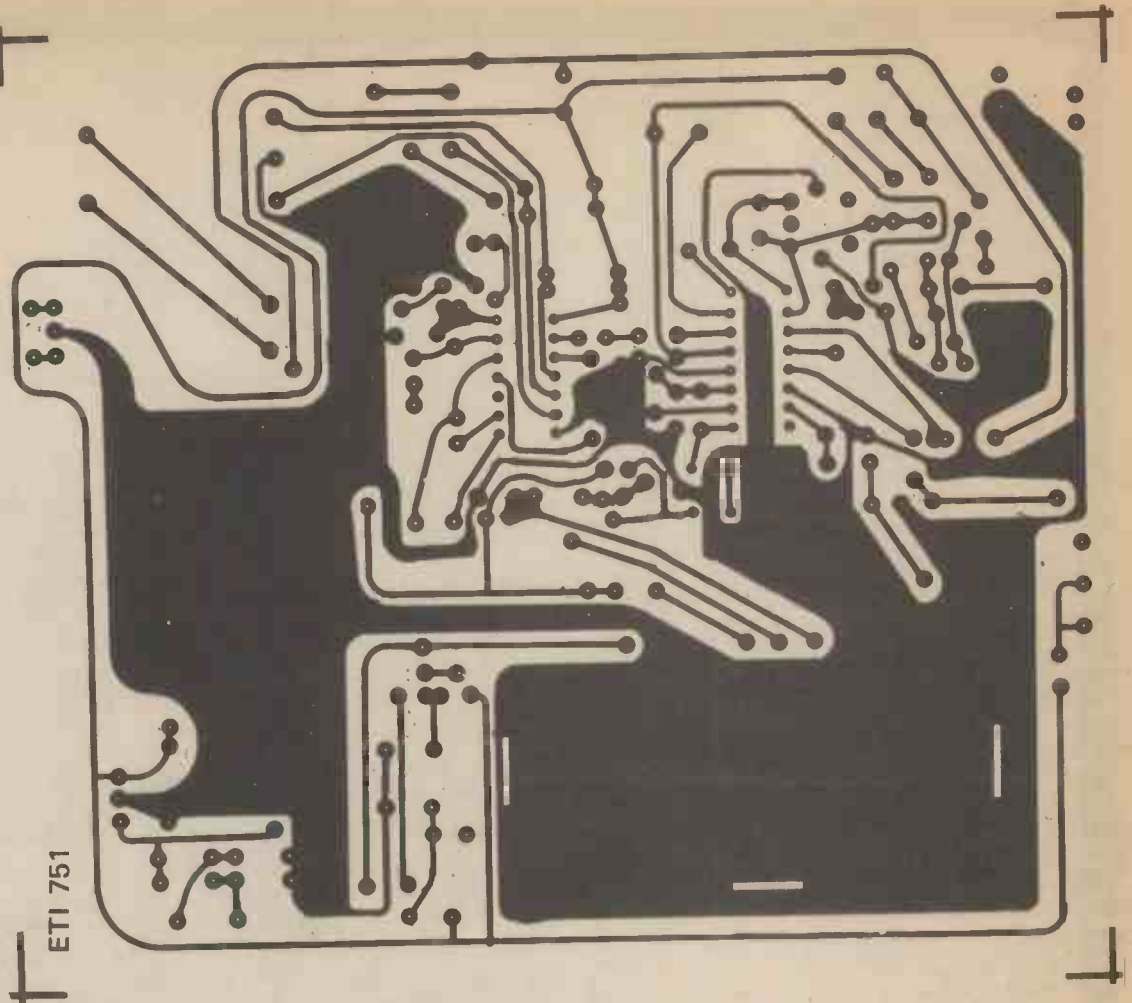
PCB layout. Due to the high frequencies used this should not be changed.
